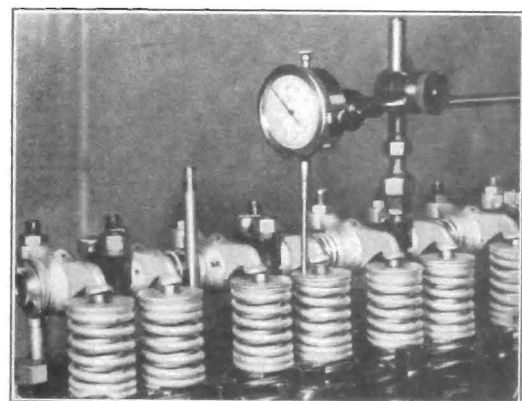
Checking Valve Timing with Indicator on No. 2 or No. 7 Cylinder
